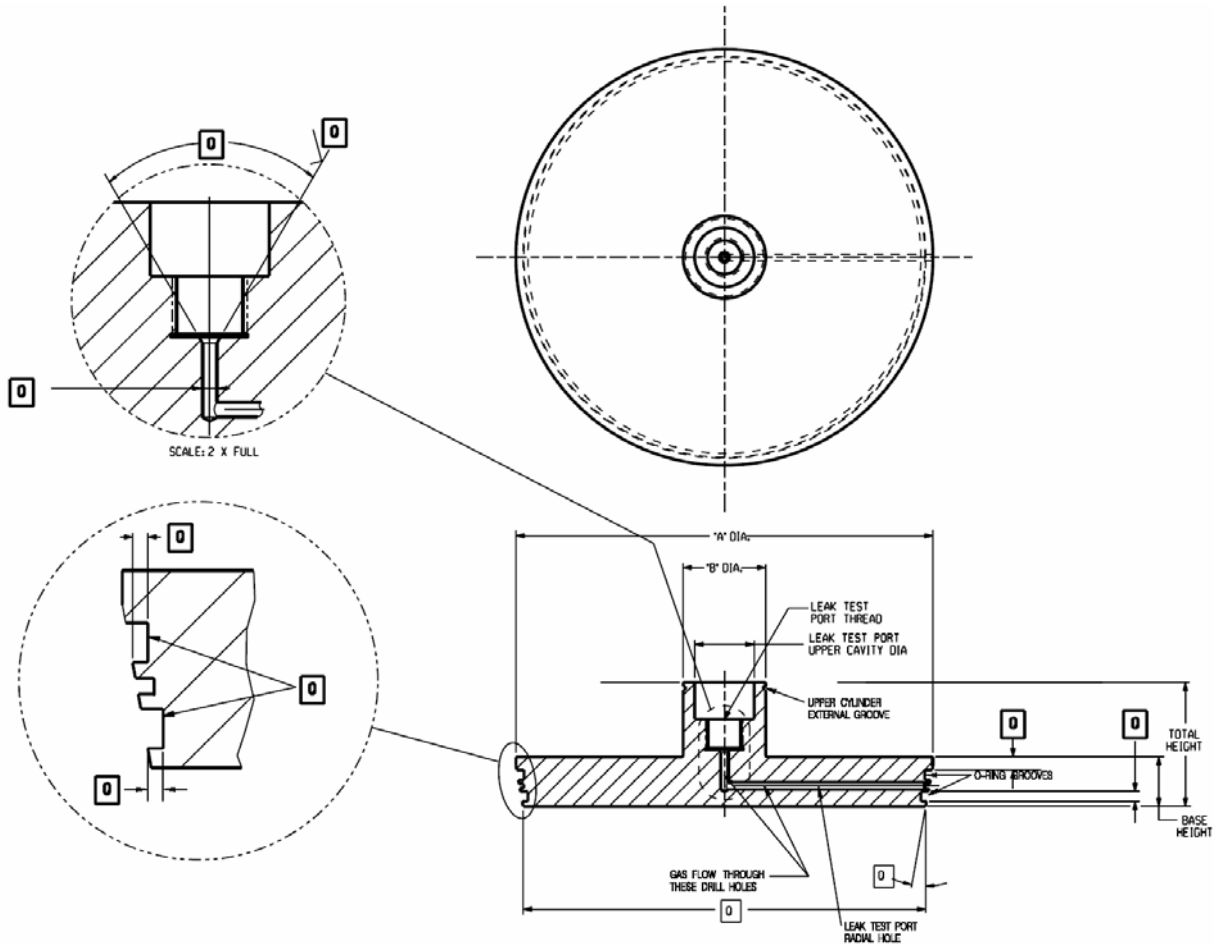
Inspection Diagram for Cone Seal Plug
